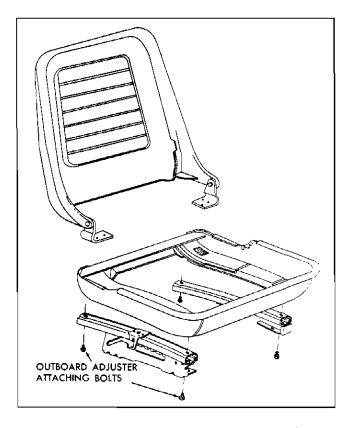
Bucket Seat Adjuster Attaching Bolts
